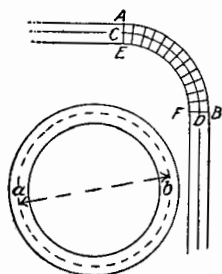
Riveting Vertical Joints in Heavy Stacks
